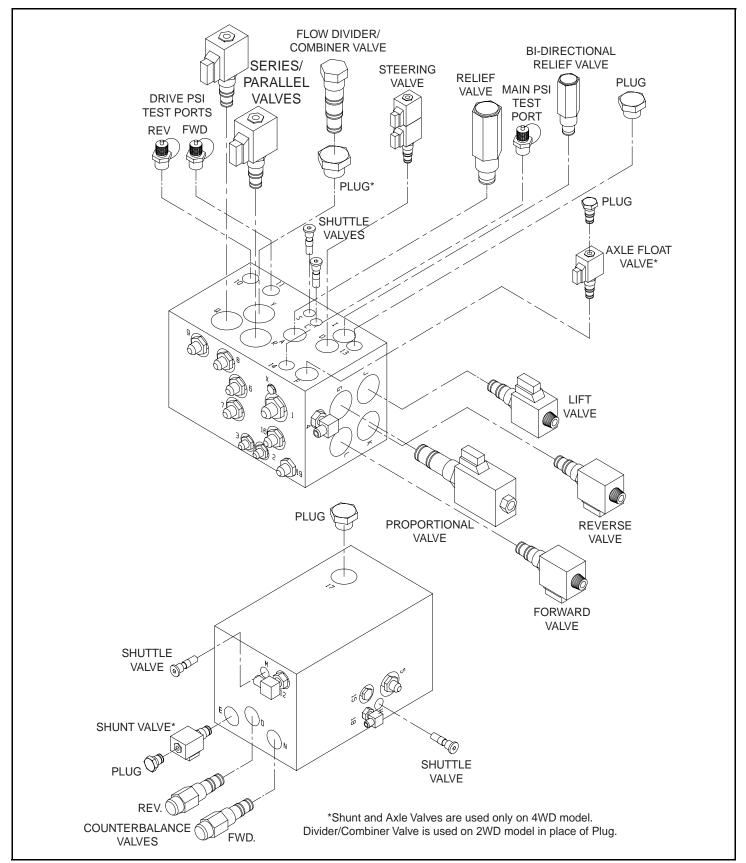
Hydraulic Manifold, Exploded View (4WD Shown)
